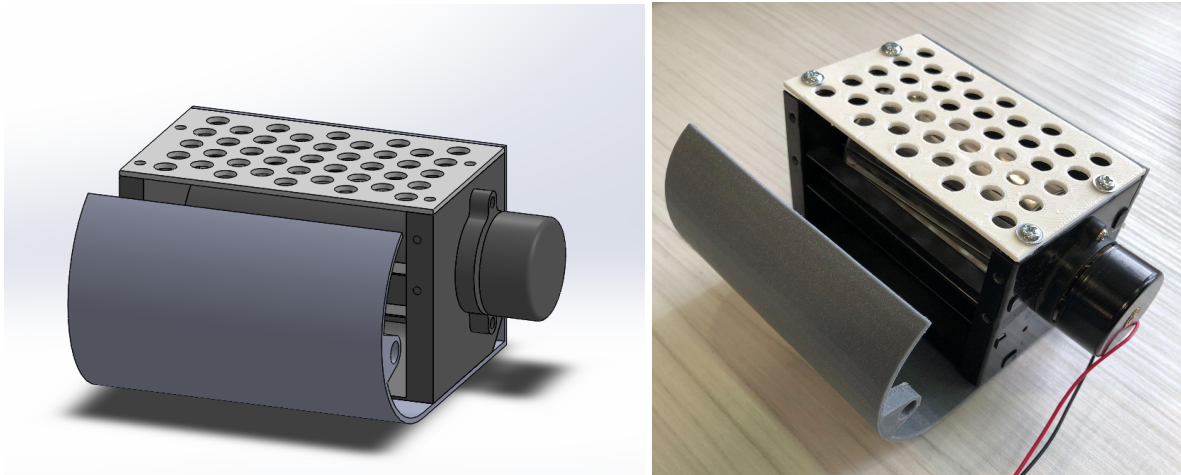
The image on the left is a 3D model of the cooler module created with SOLIDWORKS and image on the right is the cooler module with 3D printed parts
